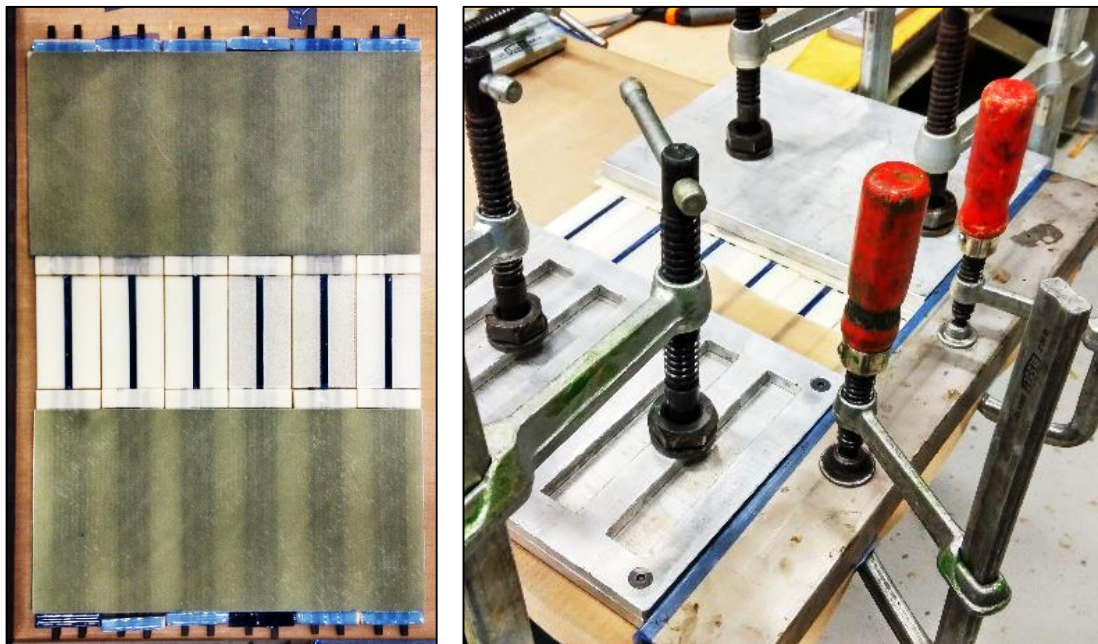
Assembly of main and support profile with Fixture- A, B & C
